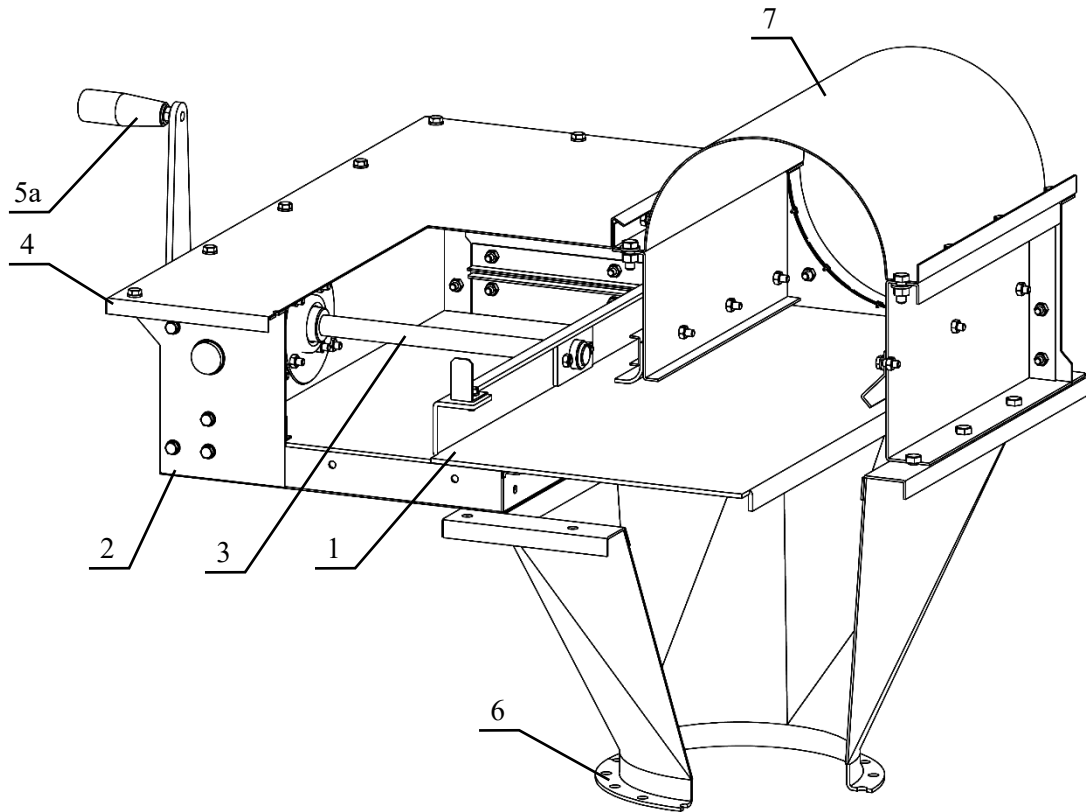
Design of shutters of the PSX... type – ZAS/M (crank driven). 1 – shutter plate, 2 – body, 3 – feed screw with a nut, 4 – cover, 5a – drive crank, 6 – outlet spigot, 7 – clamp of the conveyor fixing.
